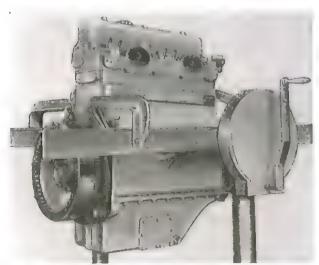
Right-side view of engine on rotary stand ARR 2216 (Note the rear brackets position).
